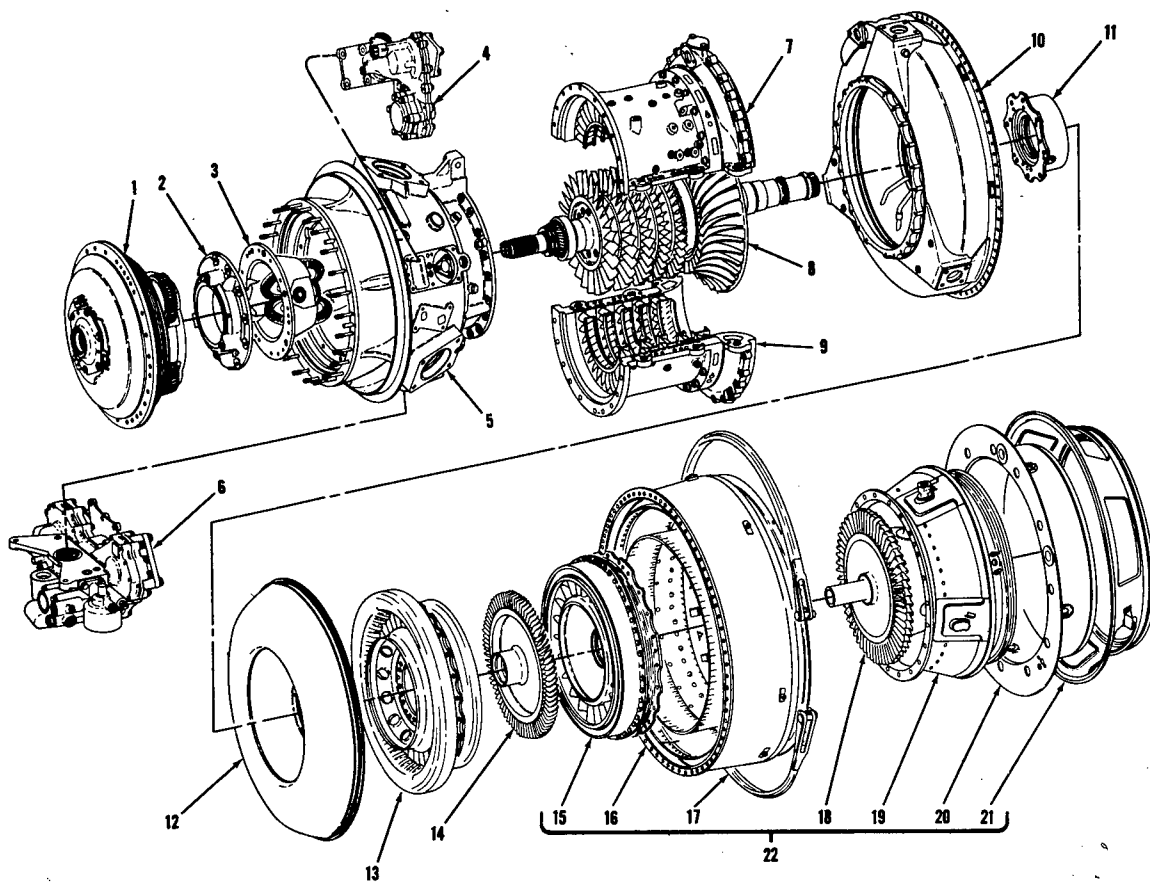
Engine Major Assemblies (T53-L-701)
